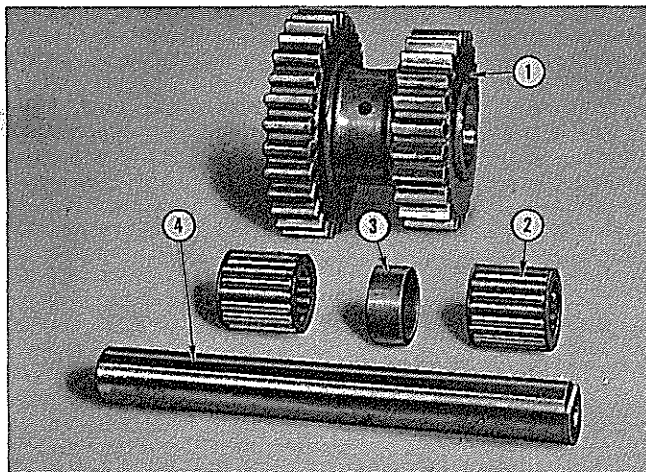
REVERSE IDLER GEAR ASSEMBLY
